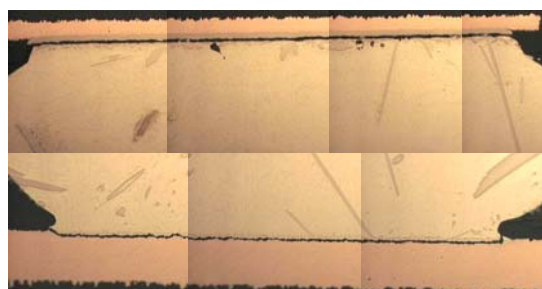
SAC405 solder joint failure in shock conditions
